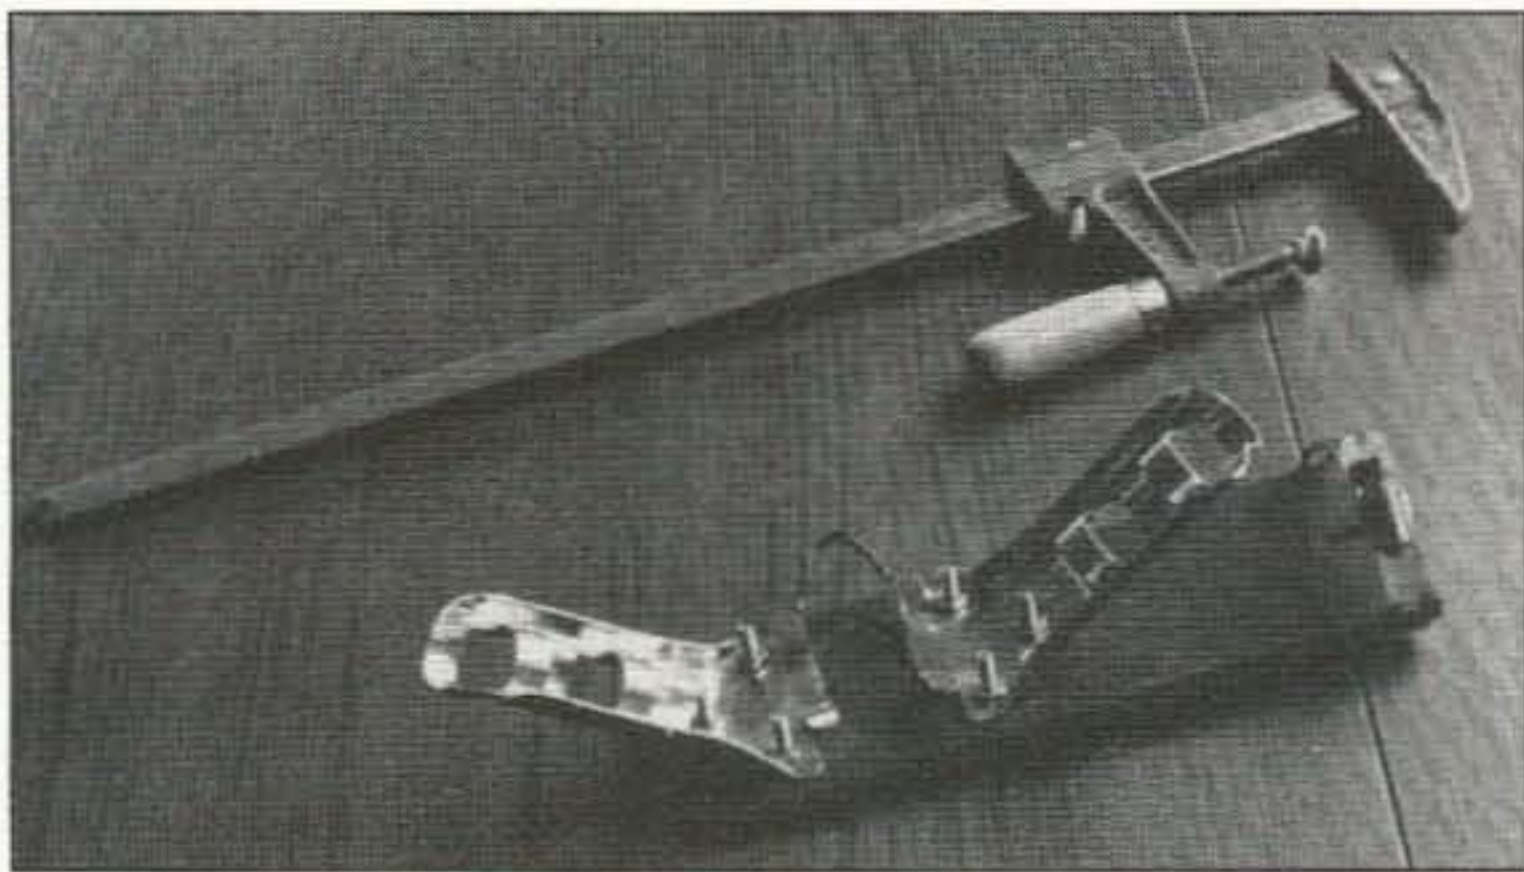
Photo F. The mounting hardware consists of 3/4" flagpole brackets on a board, and an 18" C-clamp that attaches to the board with a large hose clamp.
